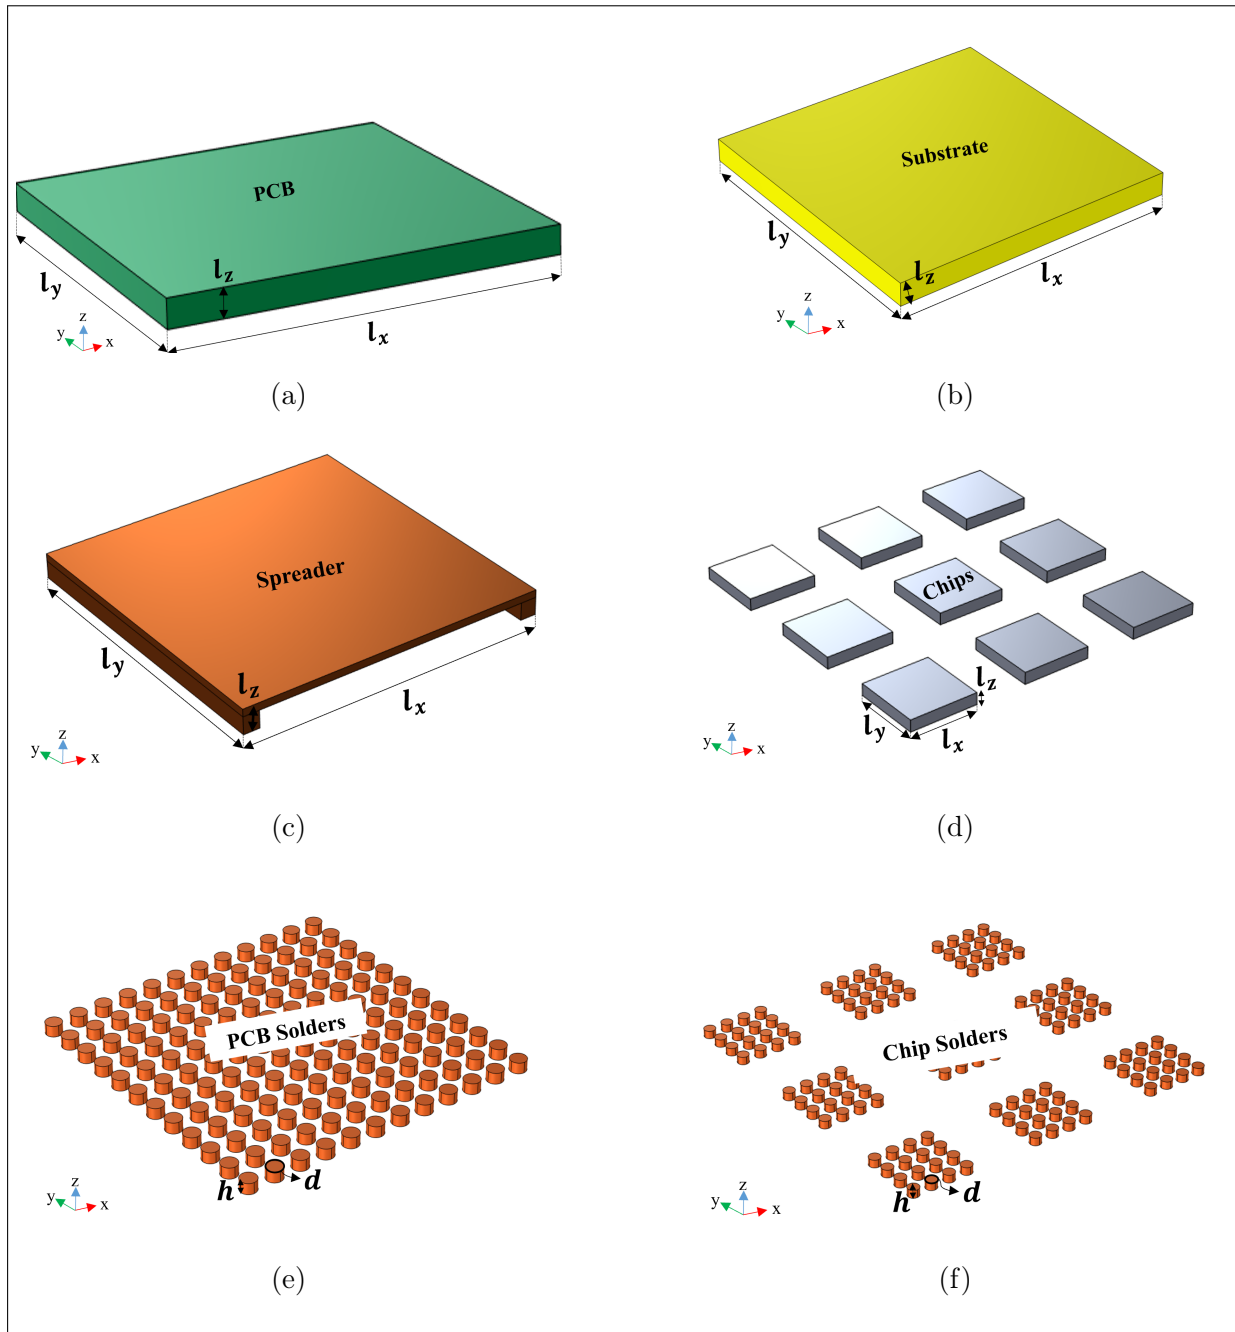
Schematic diagram of individual components (a) PCB, (b) substrate, (c) heat Spreader, (d) chips, (e) PCB solders and (f) chip solders.
